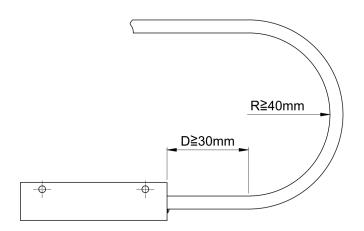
Specifications of outlet and bending radius for readhead
